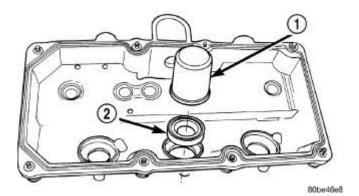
Spark Plug Tube Seal Installation Courtesy of CHRYSLER LLC
